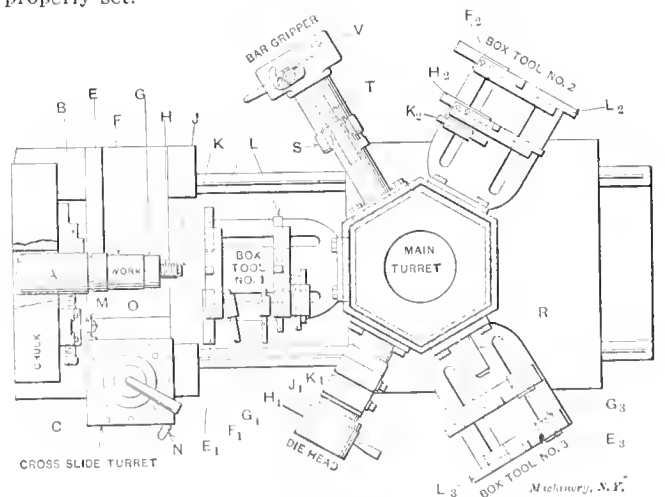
Tool Equipment used for Making Cross-head Pins.
